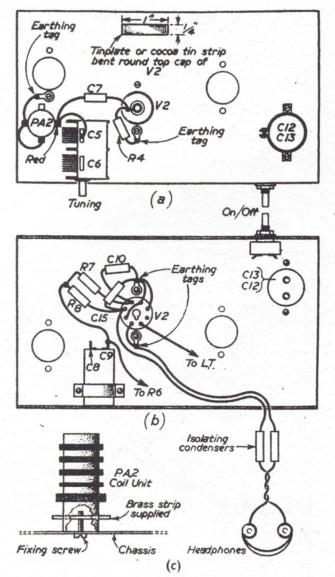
(a).—Wiring for Fig. 9. 10(b).—Underside of chassis (battery supplies not shown and previous wiring omitted). Fig. 10(c).—Details of coil fixing.
